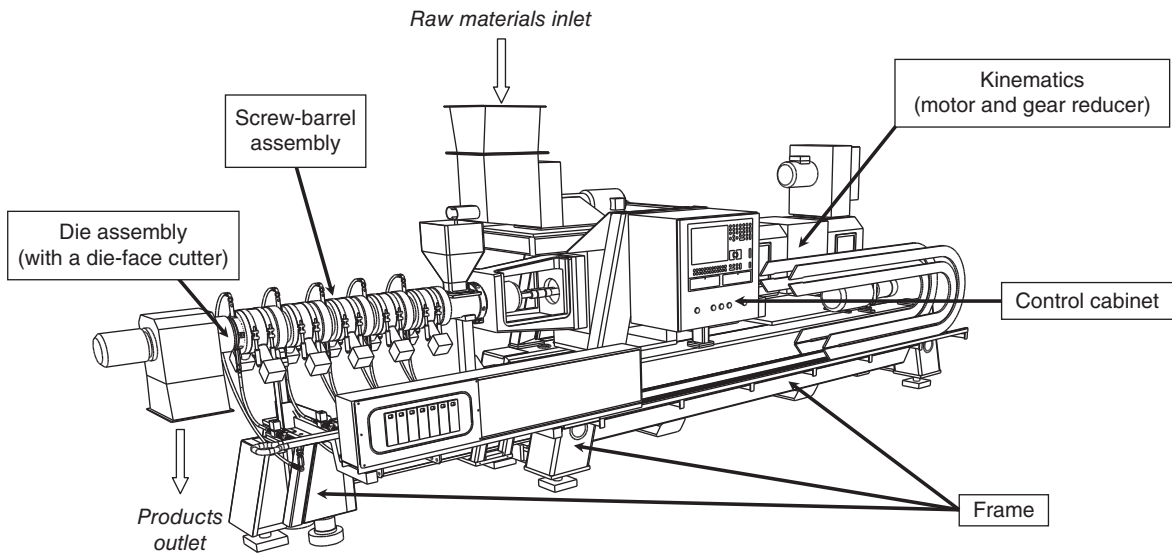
Schematic view of an extruder with the major parts. Source: Reproduced with permission of Cletral, France.
